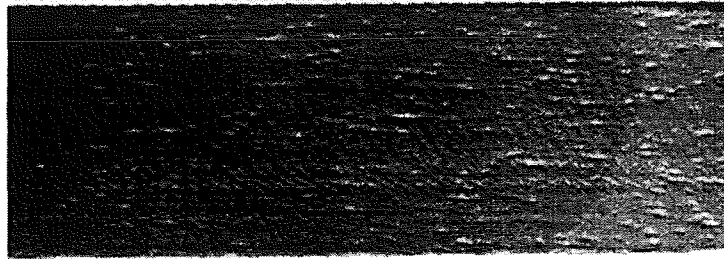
"Tool Marks" Are Seen .050" From the Bottom of the Weldment in Side View
